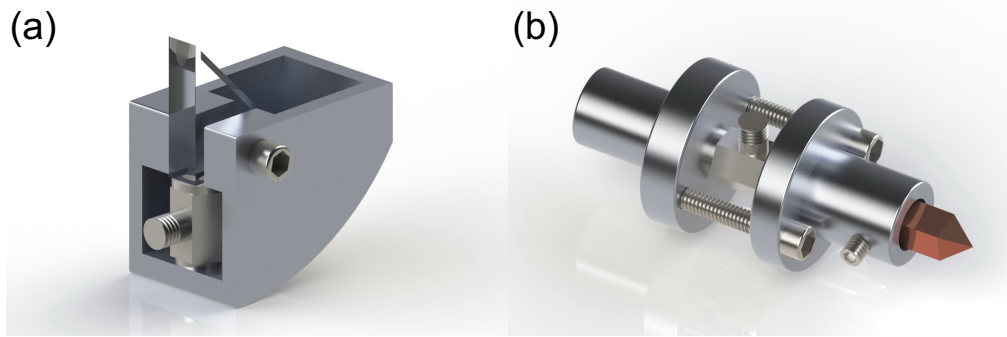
Customized fixture designs developed to measure forces in ultramicrotomy: (a) knife holder showing a glass knife mounted directly on a force sensor, and (b) workpiece holding fixture, where the sensor can be seen mounted between two flat surfaces.
